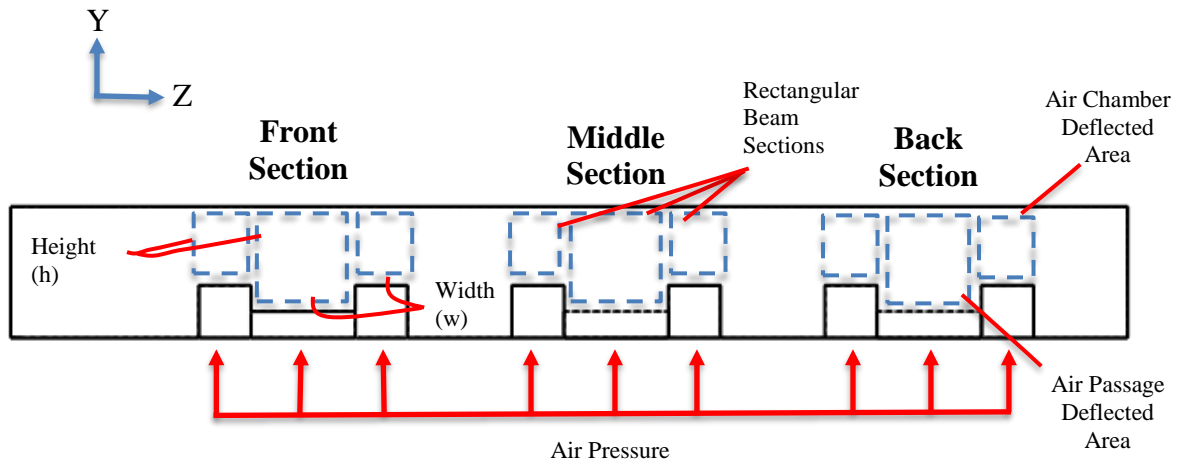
Section A-A cut front view displaying rectangular beam sections being analyzed for bending deflection.
